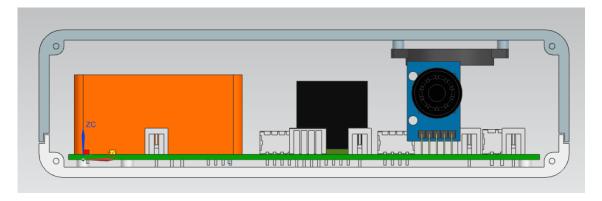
Top and bottom sides, including the PCB and the buzzer.
